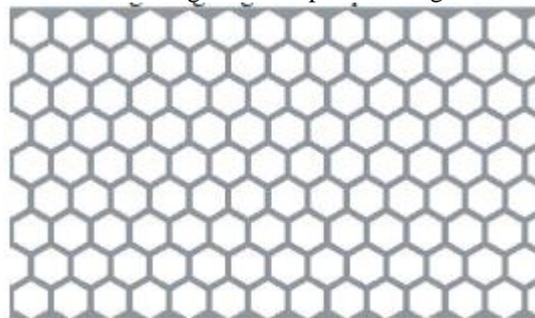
Design of SLS workpiece with artificial porosity (Honeycomb structure)
